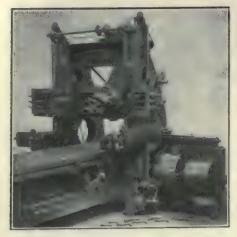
Front View, Four Wheel Right Angle Drive.
